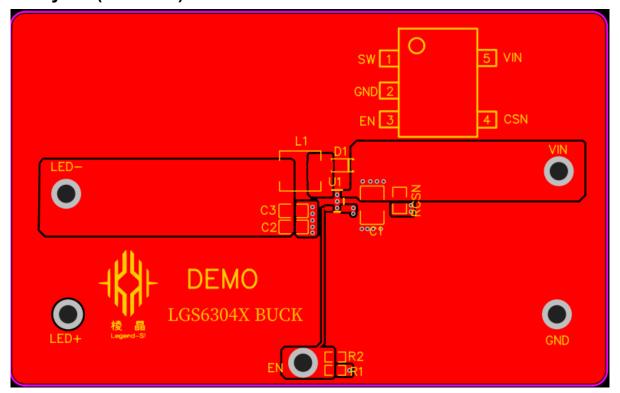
PCB Layout Plots: Top Layer Routing (SOT23-5)
